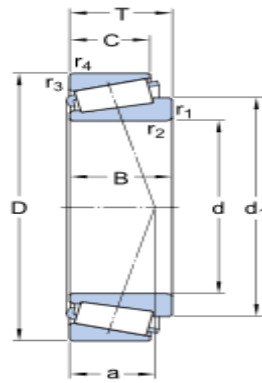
Taper Roller Bearing 30205 (Dimensions)
